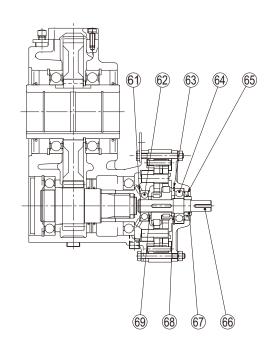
Type EHYM (Gearmotor) (Example: Frame size C6145-Y3)
